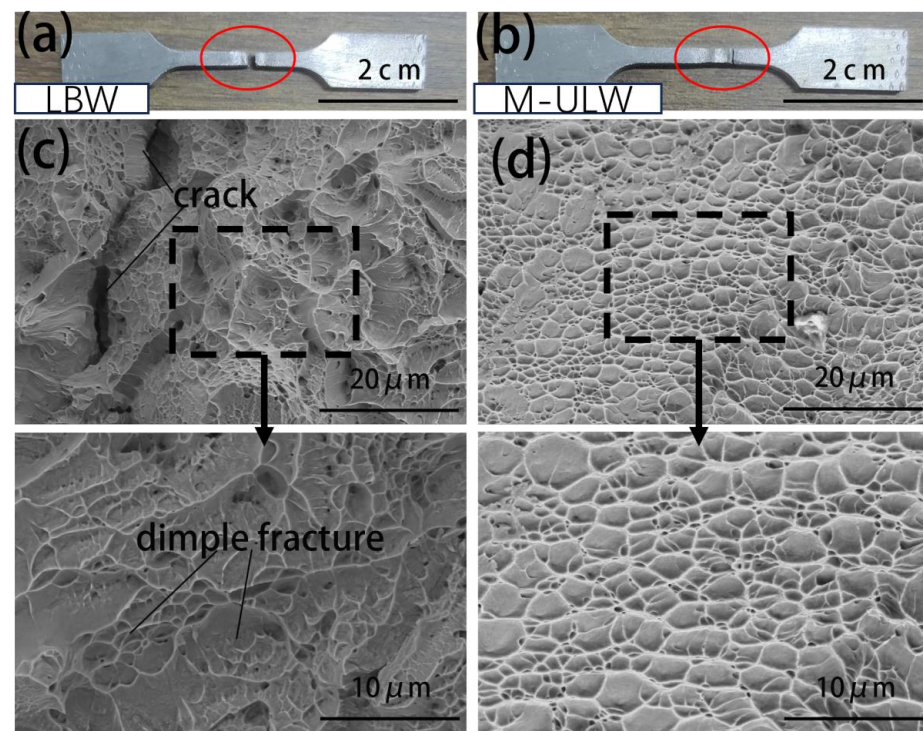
The fracture surfaces after fracture toughness testing pertaining to all welds at different magnifications: (a) schematic diagram of LBW fracture location; (b) schematic diagram of M-ULW fracture location; (c) LBW fracture surface morphology; (d) M-ULW fracture surface morphology.
